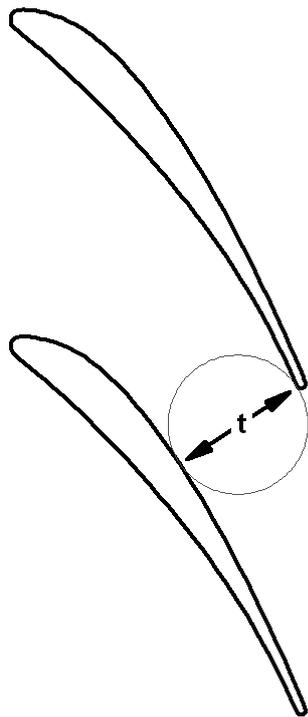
Vane passage throat width t may be adjusted by mechanically rotating aft end of airfoil
